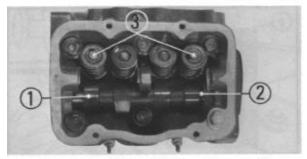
① Camshaft ③ Tappet clearance adjuster
